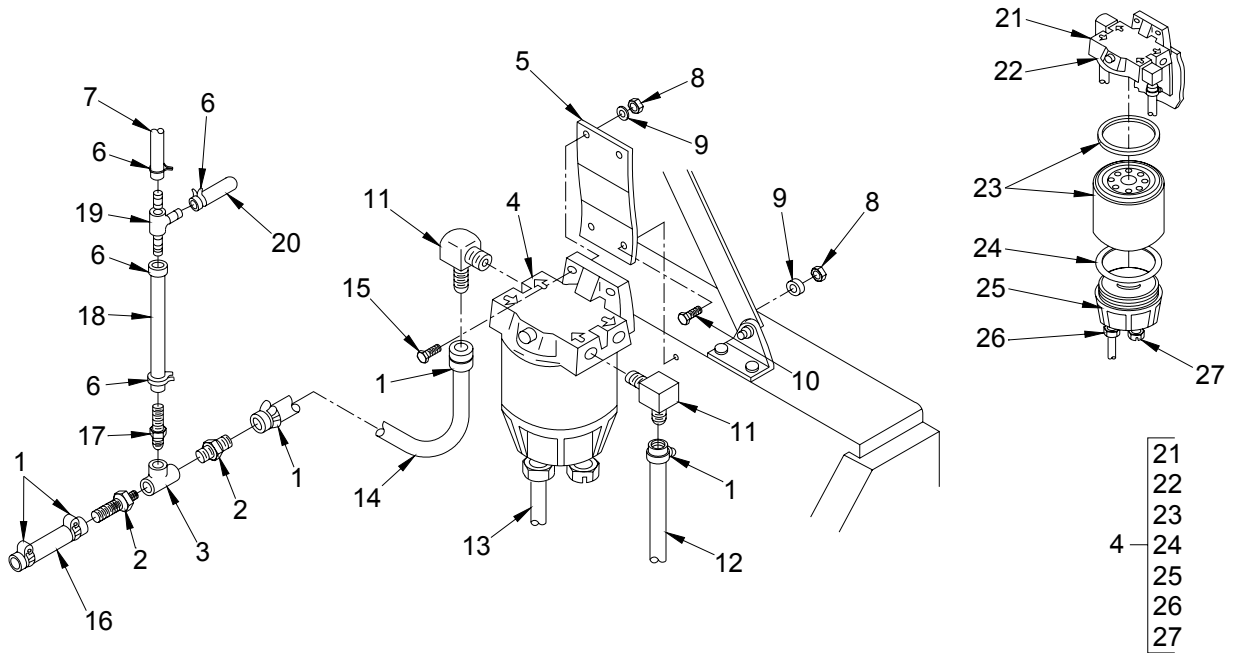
FUEL SYSTEM ASSEMBLY/FUEL FILTER/WATER SEPARATOR
